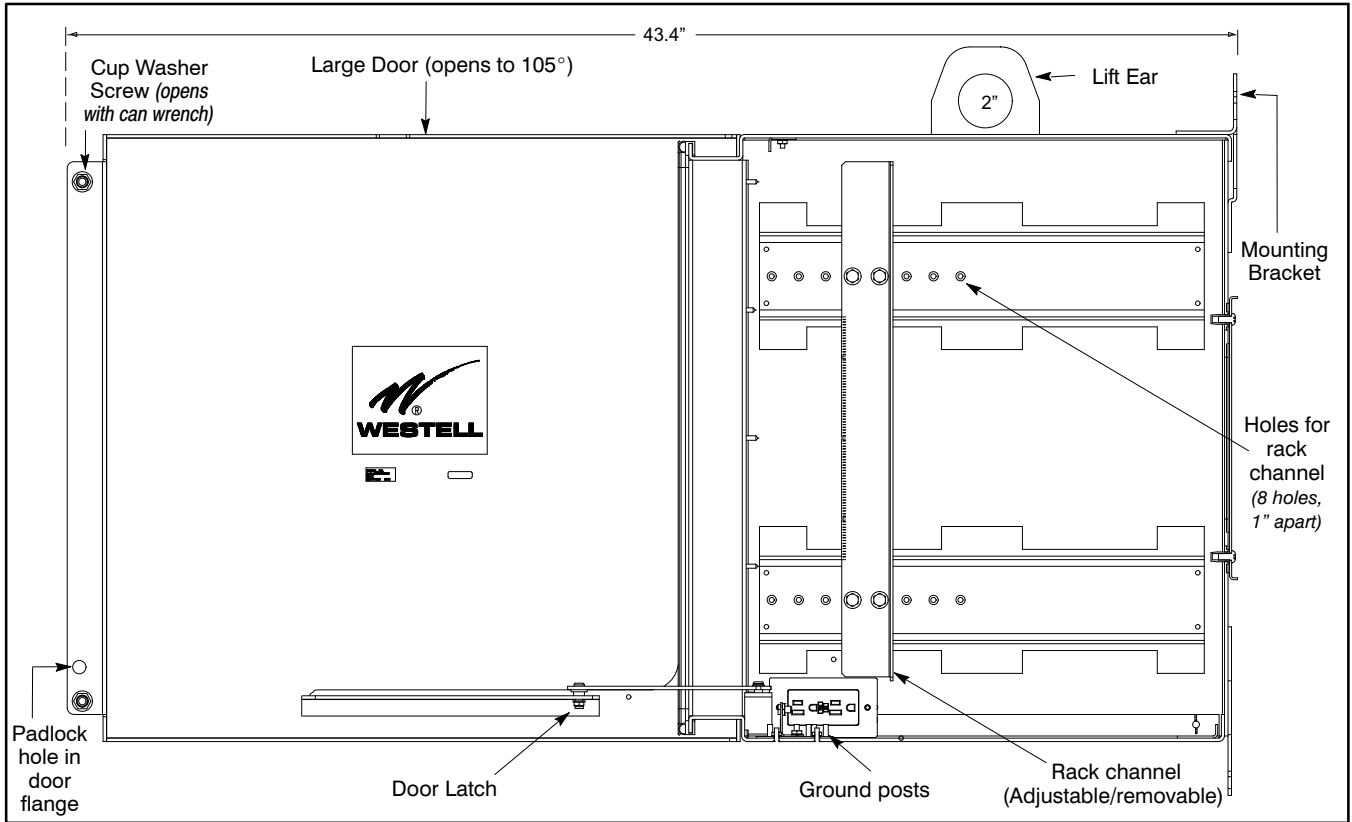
"See-Through" Right-Side View of Cabinet Interior, Door Open
